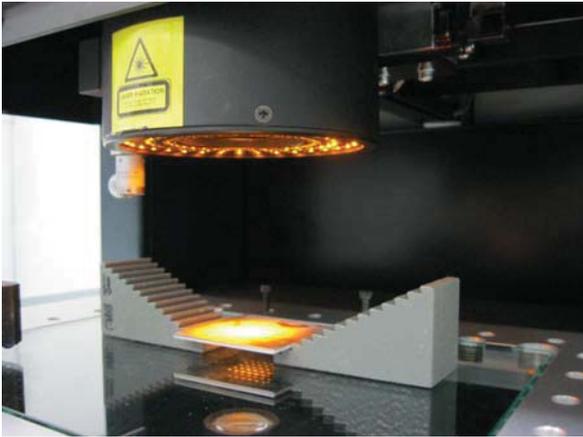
Workpiece placement when burr widths measured via the optical CMM.
